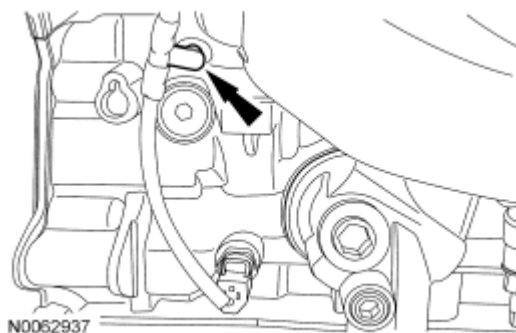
Identifying Wiring Harness Pin-Type Retainer
